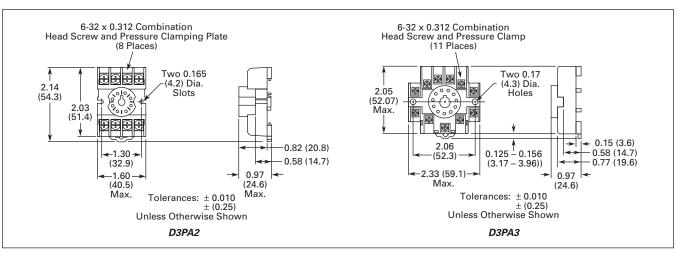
D3PA2 and D3PA3 Sockets — Approximate Dimensions in Inches (mm)
